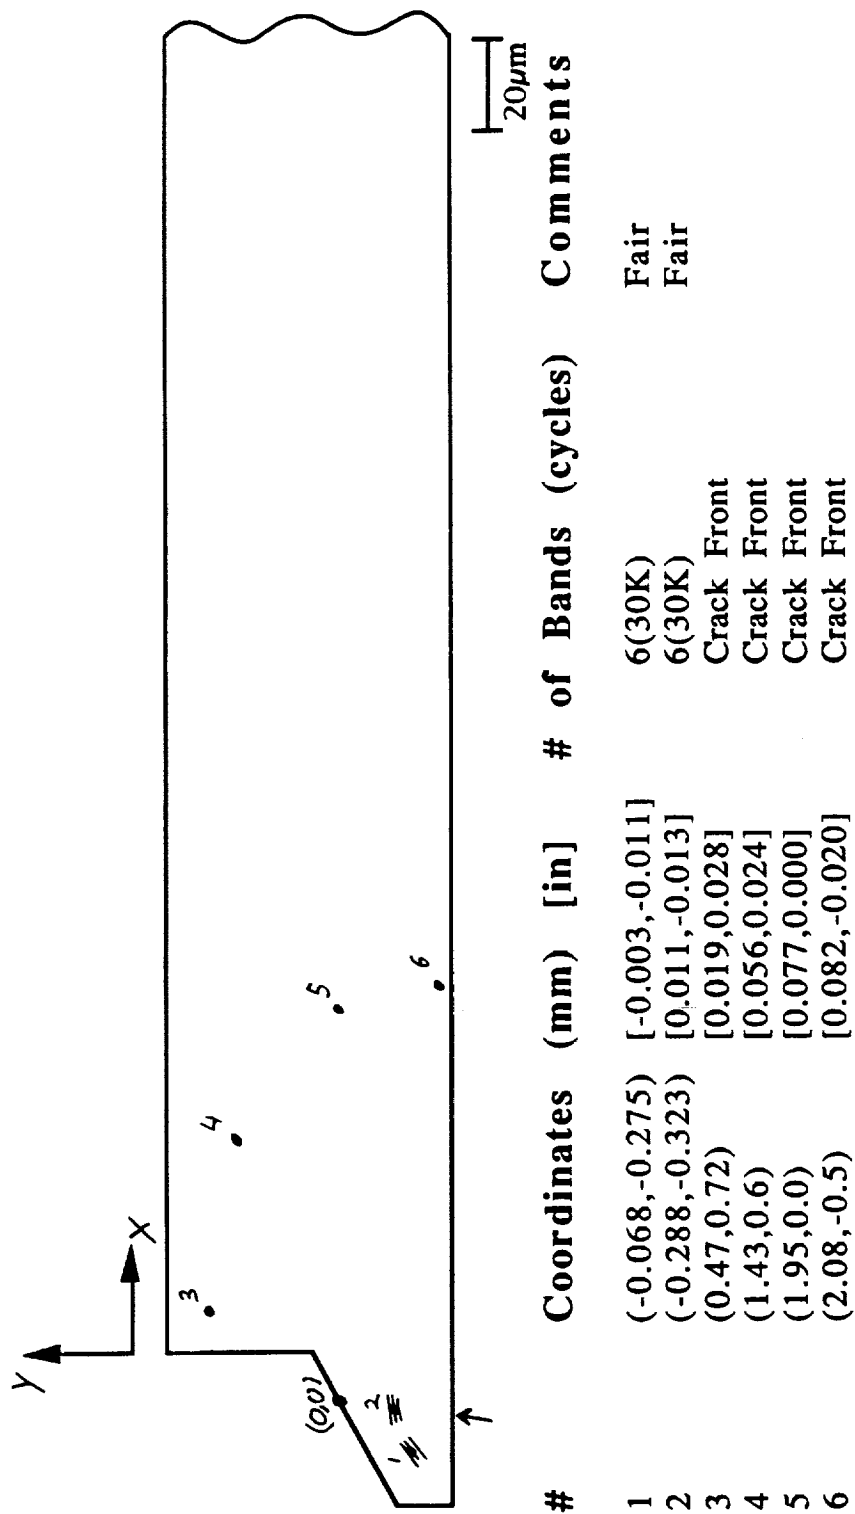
Rivet hole schematic: Upper rivet row, hole number 4J3, fatigue crack growth is in the forward direction.
